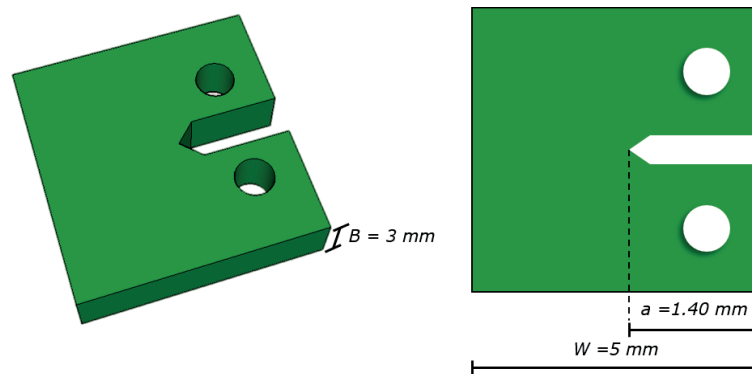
Compact Tension 3D printed specimen used for fracture toughness measurements.
